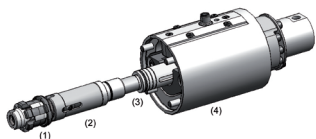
Complete unit for automatic HSK tension with HSK clamping set (1), locking unit (2), pull bolt extension (3), clamp and release unit (4)
